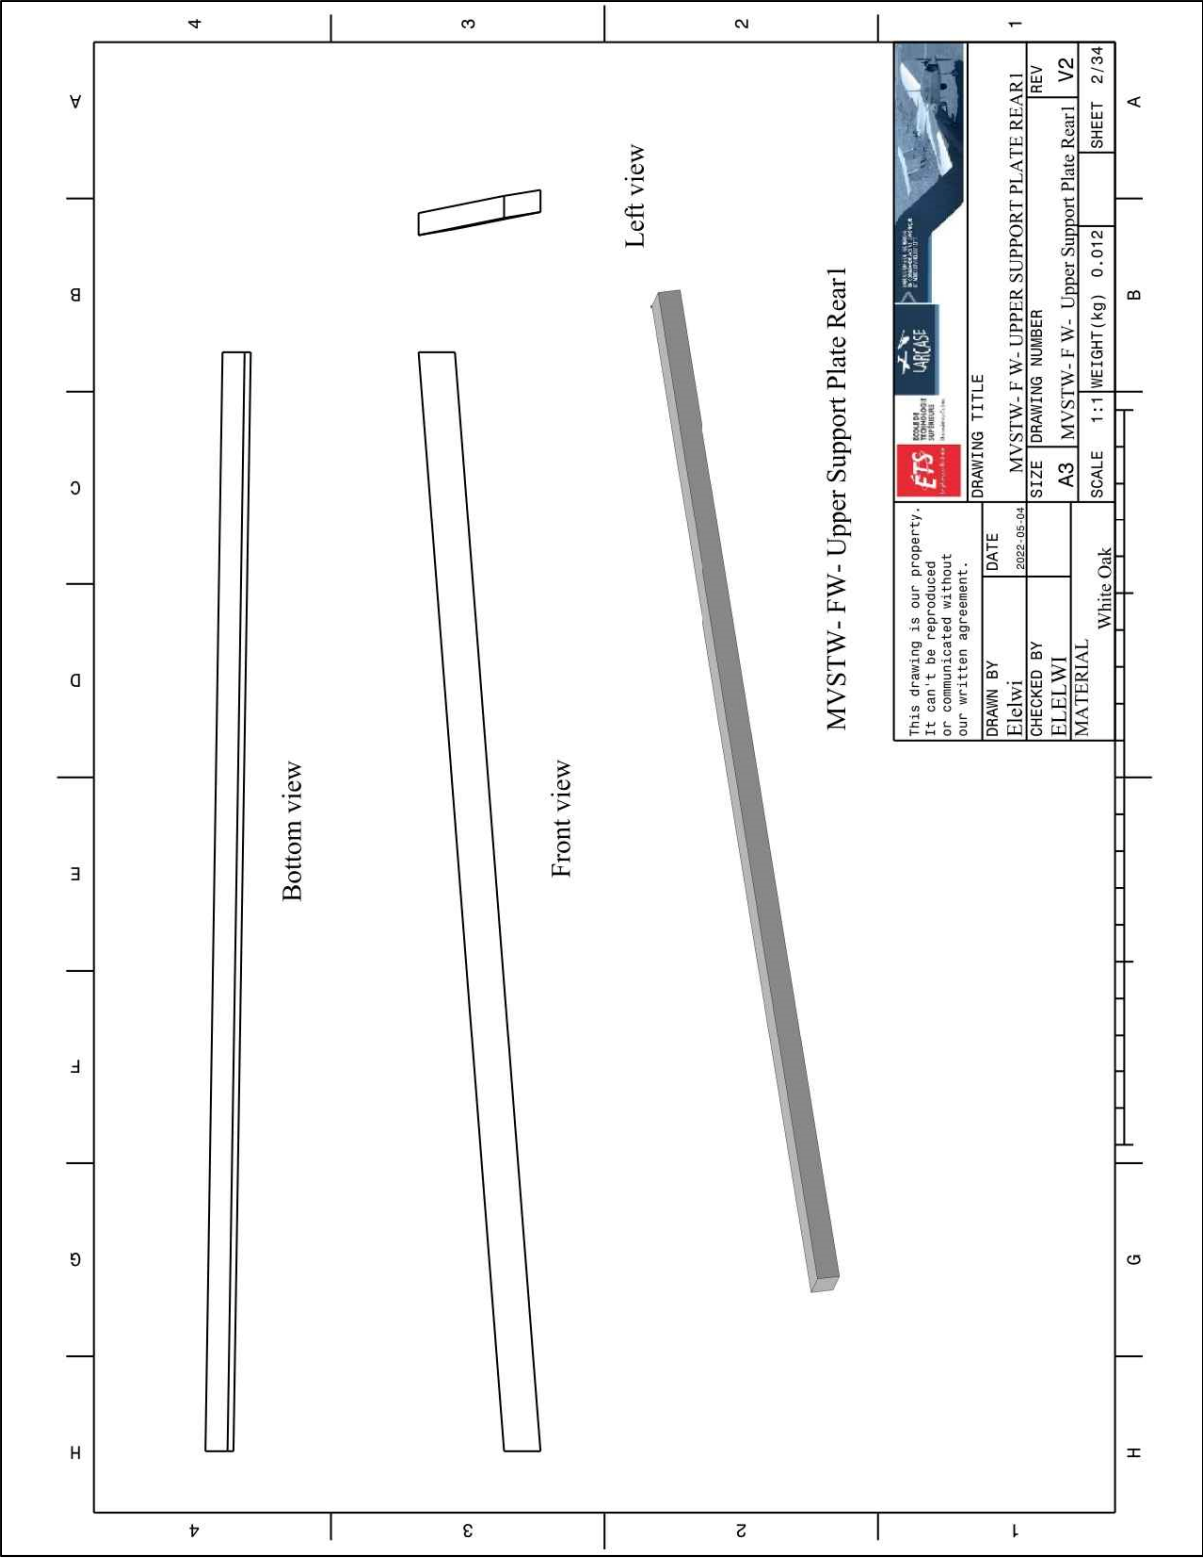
MVSTW Fixed Wing Upper Support Plate Rear1 Using White Oak
